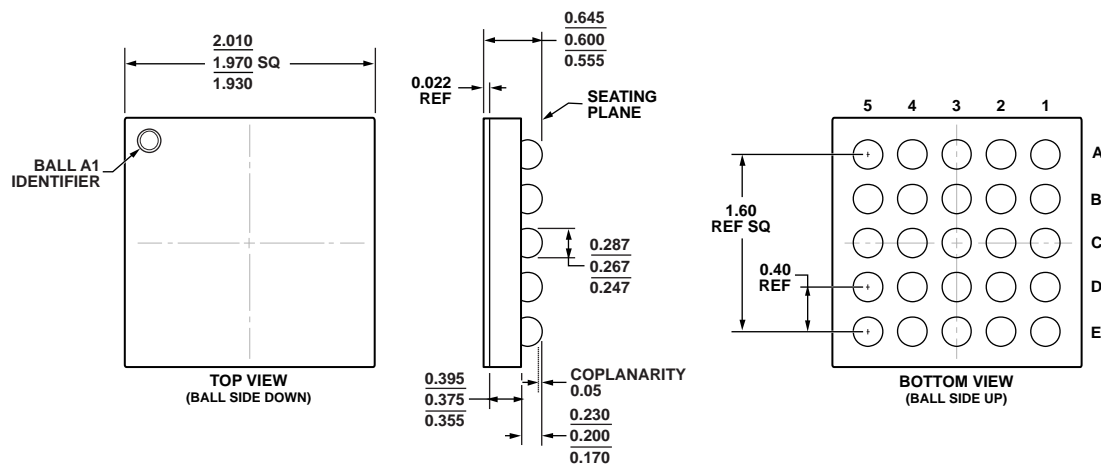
25-Ball Wafer Level Chip Scale Package [WLCSP]
